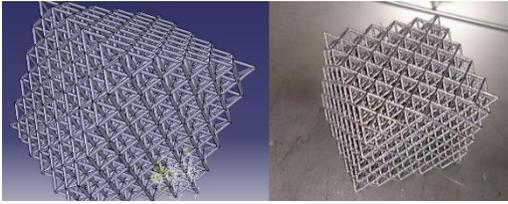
Lattice structure designed in CAD and manufactured with Electron-beam-melting (EBM) machine
